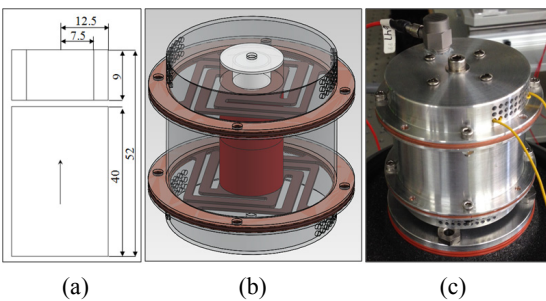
(a) Optimal dimensions for the maximum output power, (b) 3D CAD model of the prototype and (c) photograph of an assembled device
